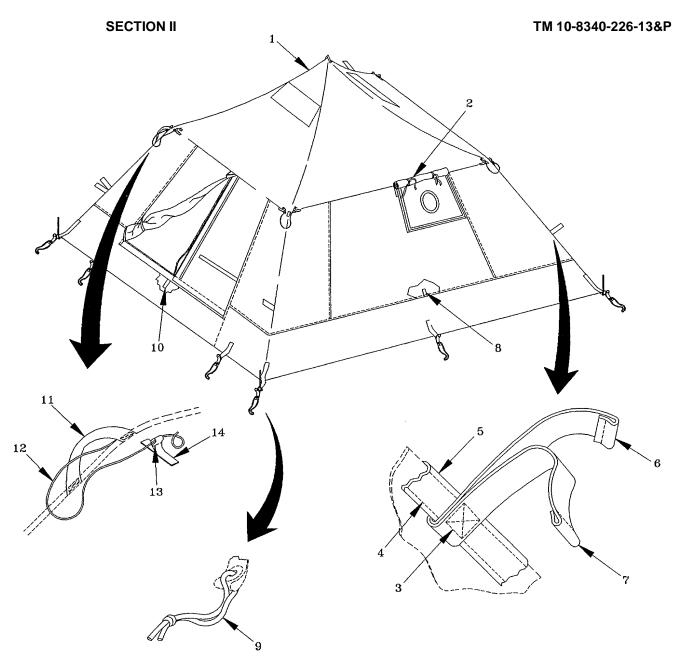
TENT BODY ASSEMBLY (Sheet 1 of 10)
